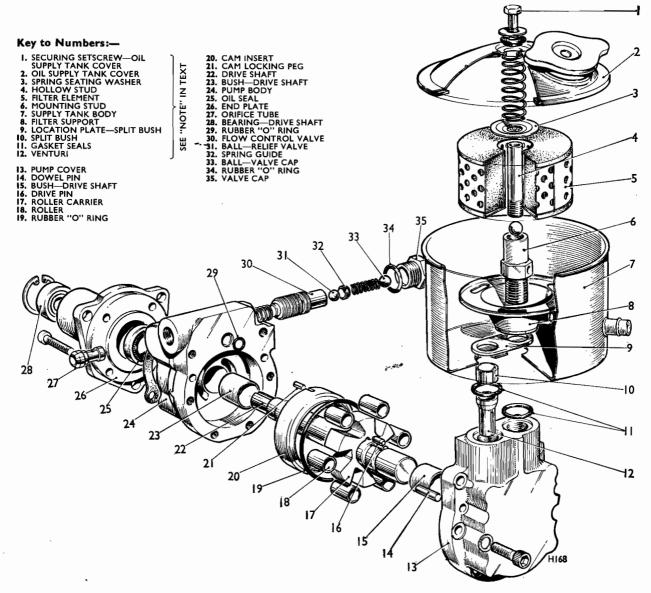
Exploded view of typical hydraulic pump and oil supply tank
